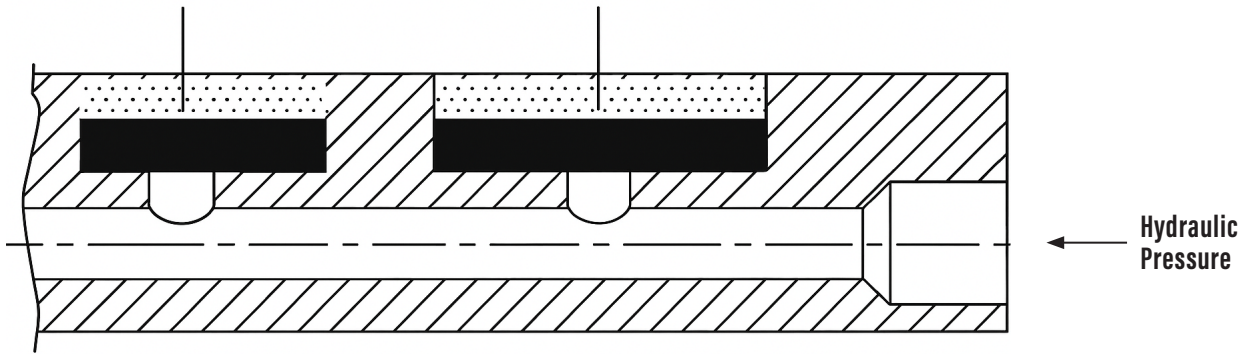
Clamp disks in a parallel gib, oil pressure through feeder hole.
